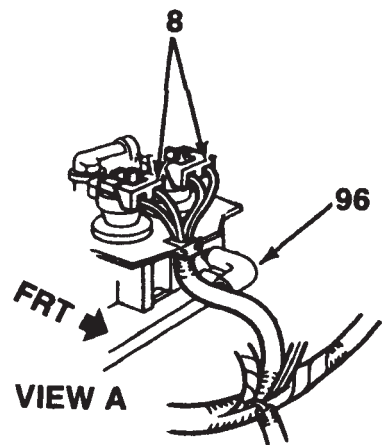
Engine Wiring - Right Side - 2.8L Engine
